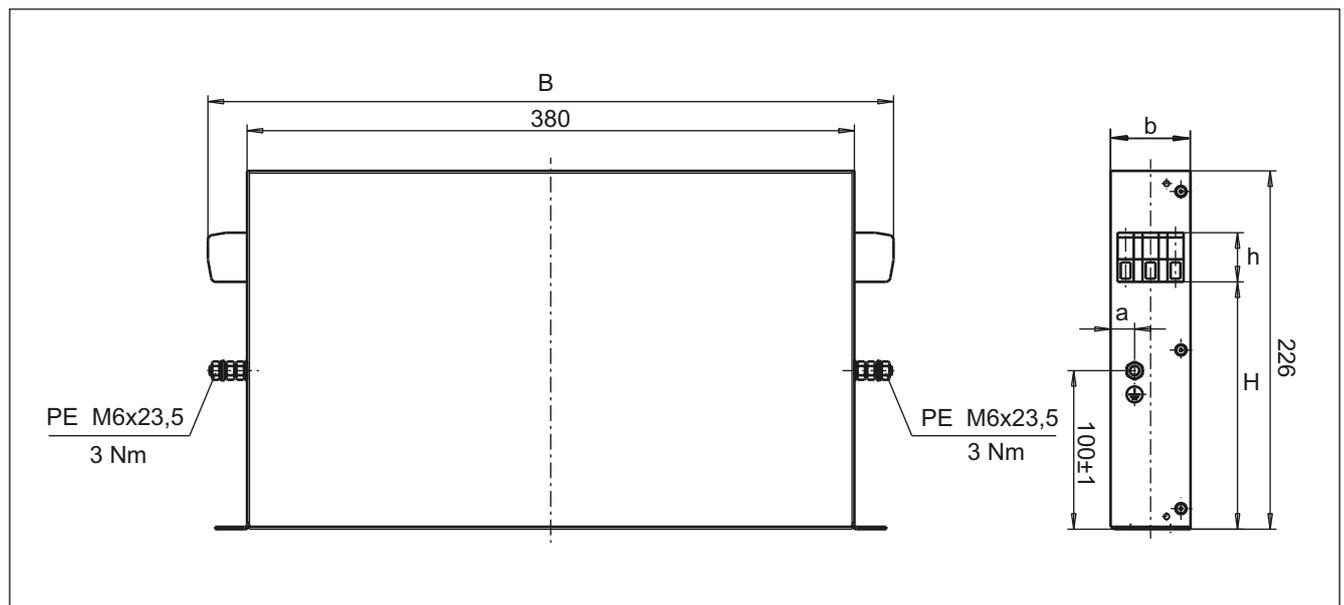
Dimension drawing: Basic Line Filter 55 kW
